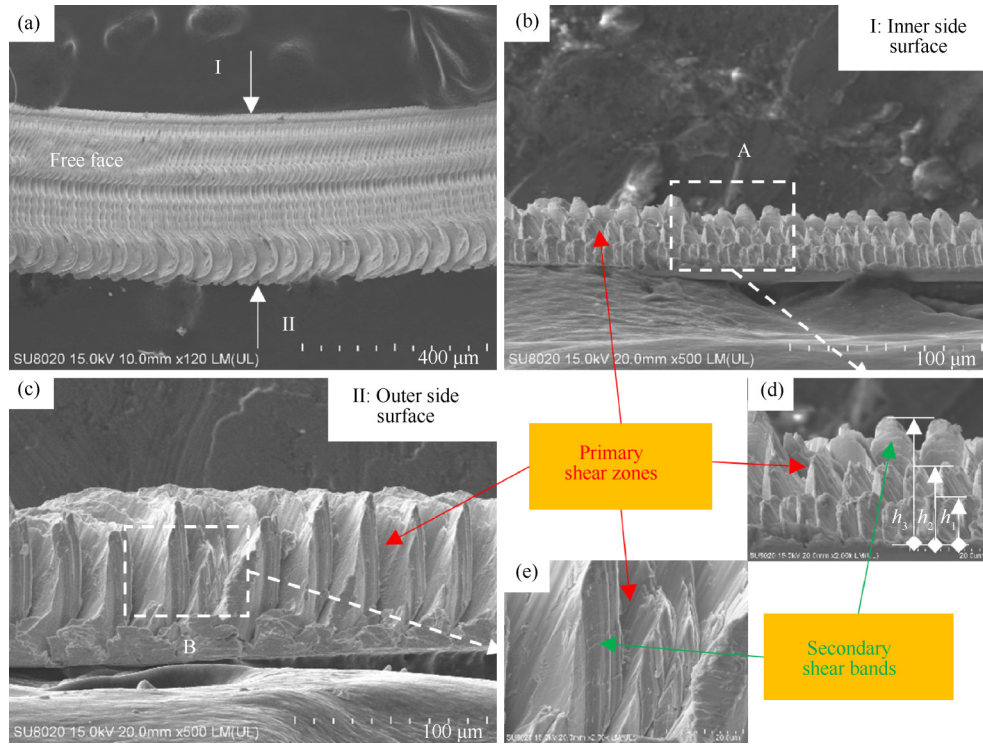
SEM images showing typical serrated chip morphology of Zr57 BMG at a corner radius of 0.4 mm. (a) Free surface morphology of chip, (b) I-side view of chip showing medial surface, (c) II-side view of chip showing extracellular surface, (d) Details corresponding to square "A" in (b), and (e) details corresponding to square "B" in (c).
